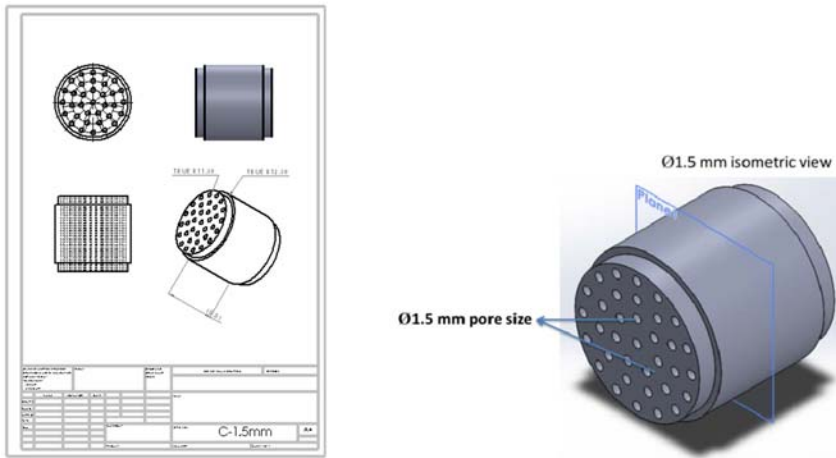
(A) Drawing and (B) CAD model of a channel having a 1.5 mm pore size.
